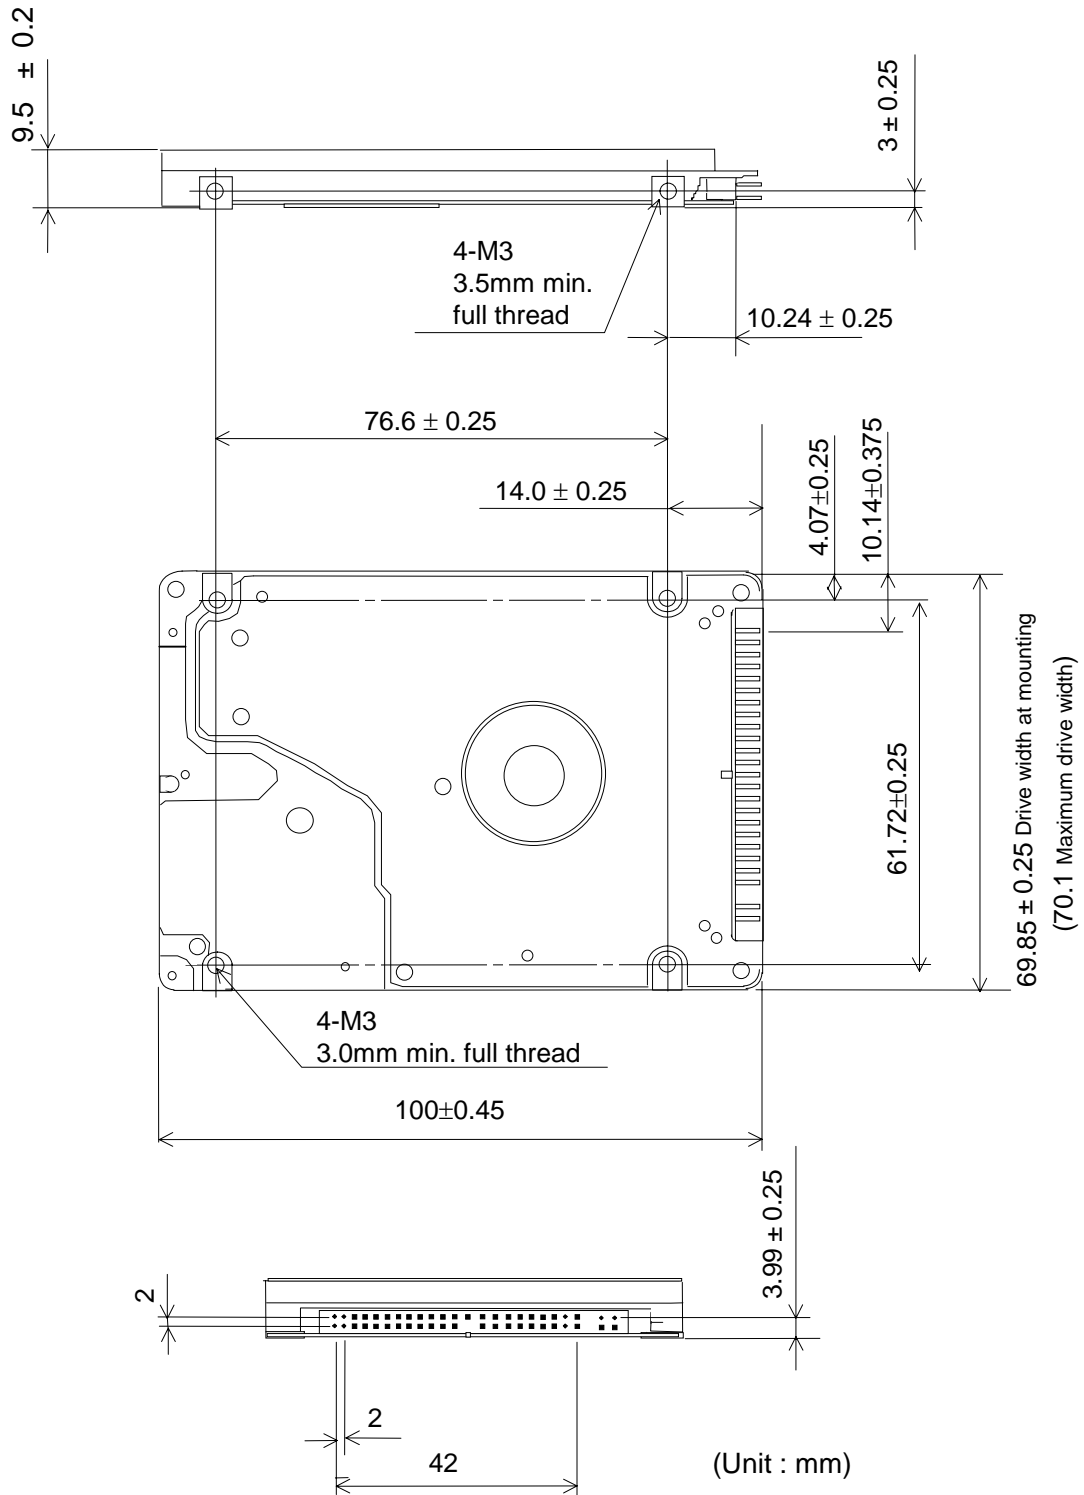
Dimensions (DK23DA-40F/30F/20F/10F)
